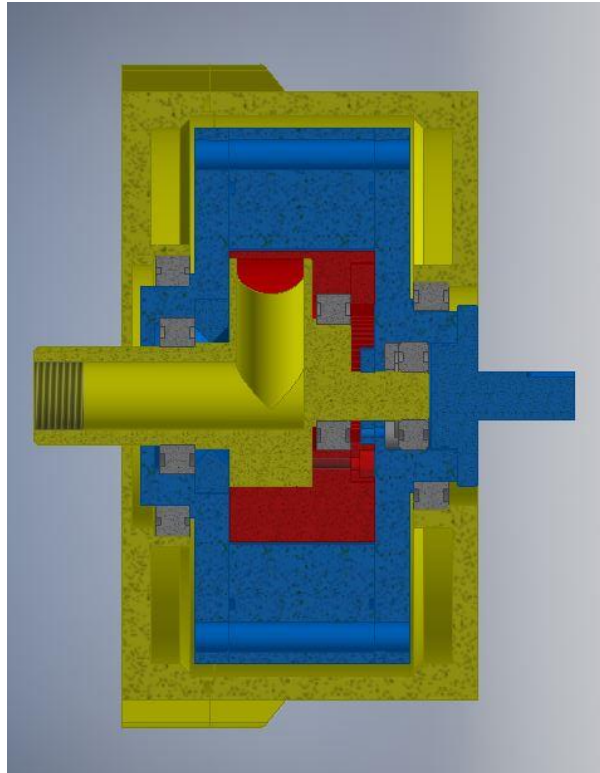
Cross-sectional view of CAD assembly for the static shaft Wankel expander's first prototype
